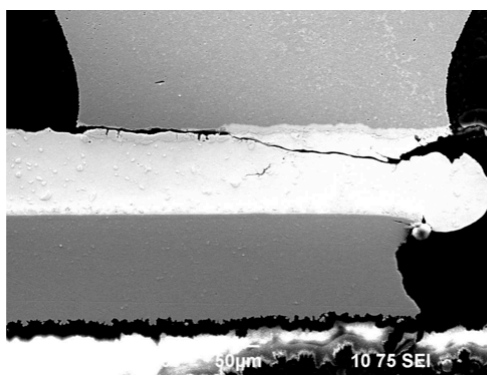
SEM image of solder joint Pin30 in Component U18 on Board F08
